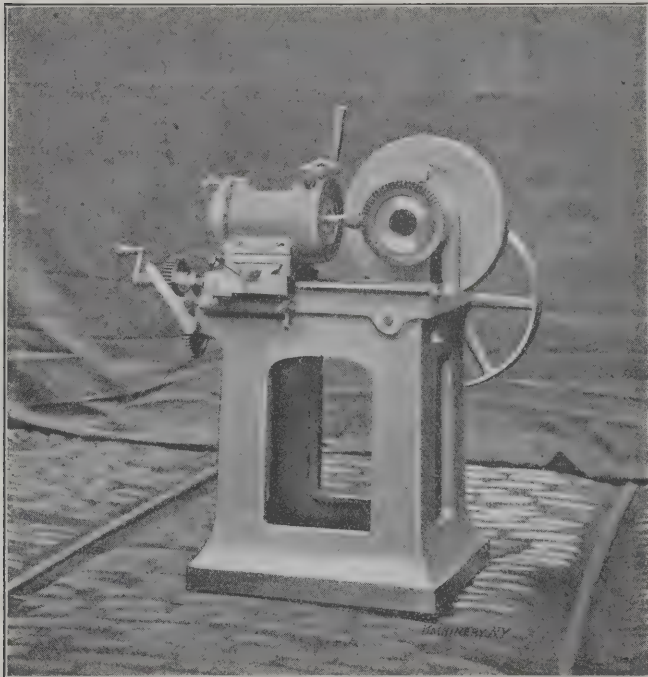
Nut Milling Machine, Joseph Whitworth & Co. (1866)
